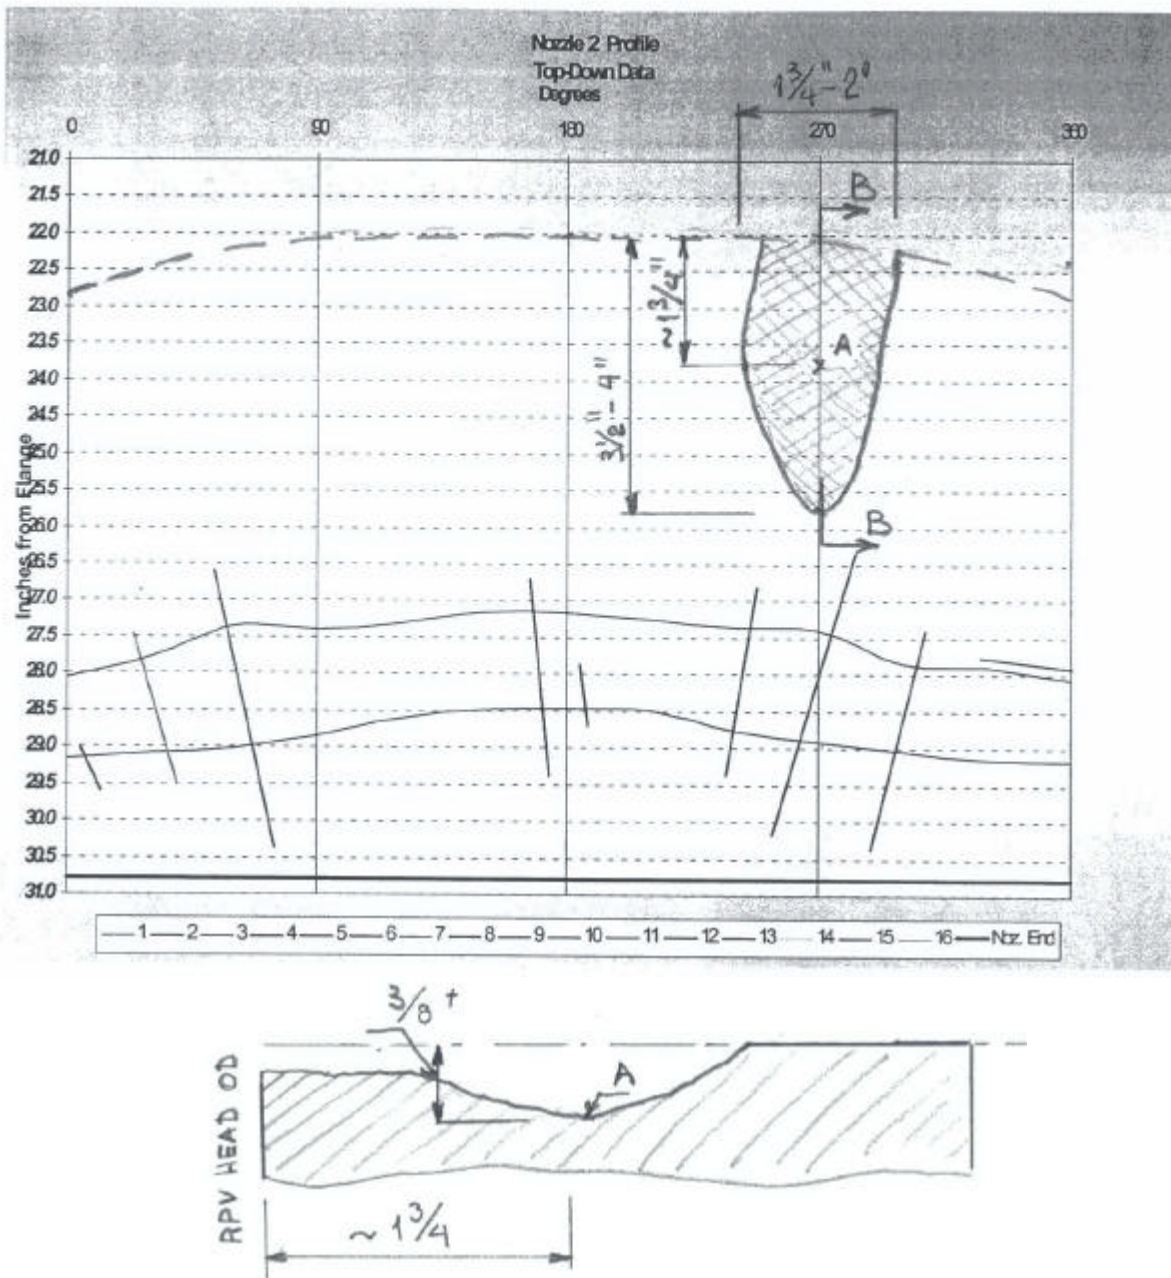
Nozzle 2 Corrosion Area Location, Size, and Profile.
